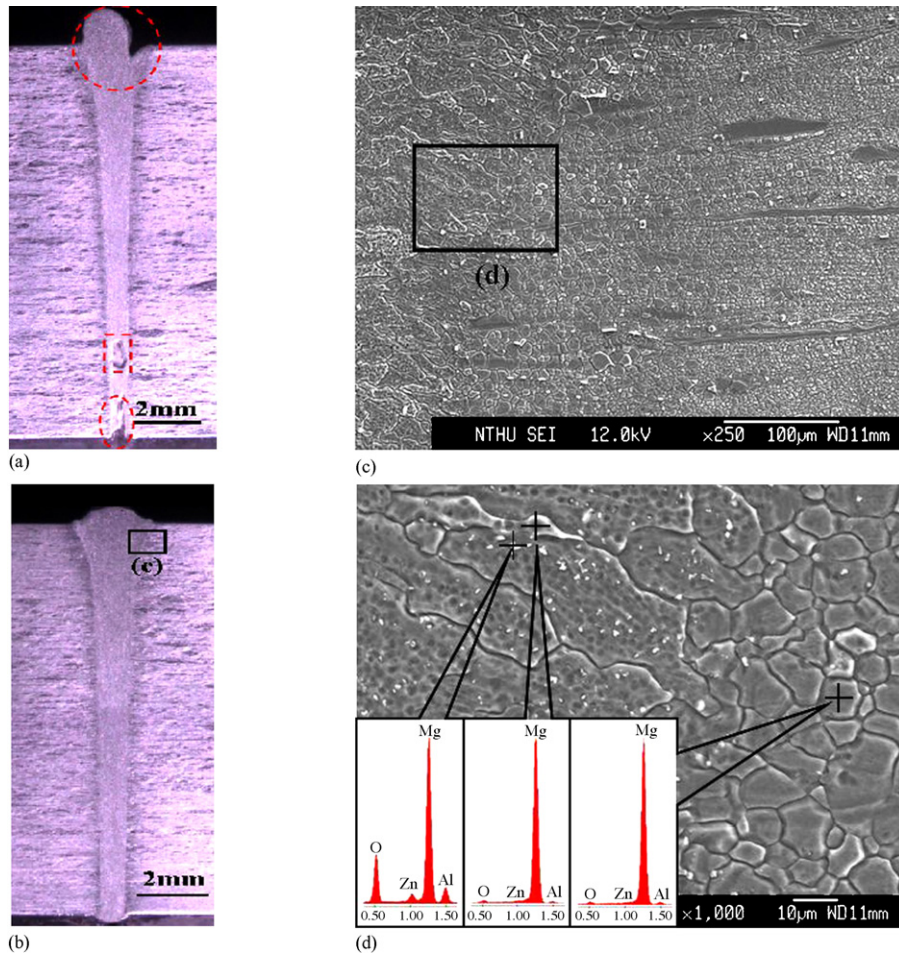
Microstructure observation and EDS analysis for the cross section of worse and optimum weld. (a) Cross section of worse weld. (b) Cross section of optimum weld. (c) SEM photograph at the weld boundary. (d) SEM photograph at the weld boundary.
